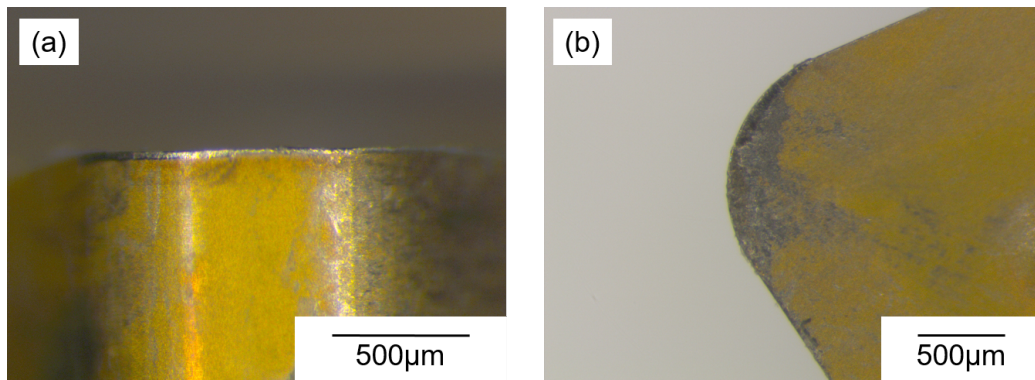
Example tool wear produced during face turning of face 2 of billet 4_1. The tool shown was used during the 3rd repeat of face 2. The tool shown is representative of all passes performed on face 2.
